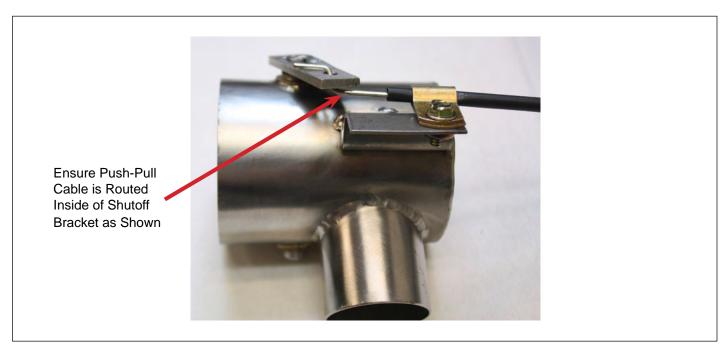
Manifold P/N 22127 Push-Pull Cable (Reference Only)
